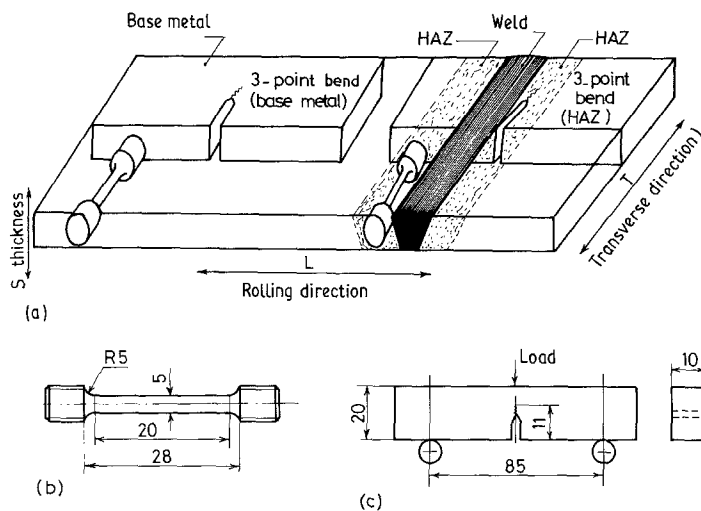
Location and dimensions of tensile and fracture specimens. (a) Location of different specimens, (b) tensile specimen dimensions, (c) three-point bending specimen dimensions.
